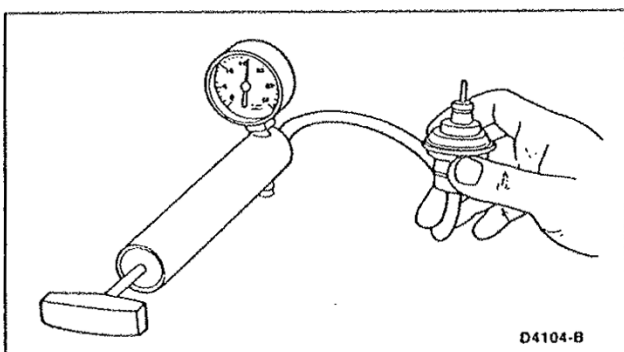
Testing Transmission Vacuum Unit for Leakage
